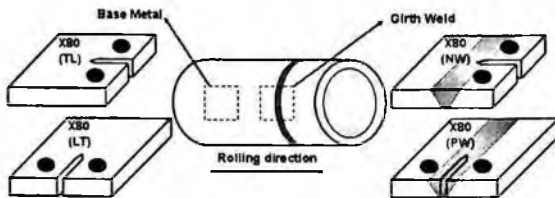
Schematic representation showing the CT specimens sectioned from the welded pipeline.
